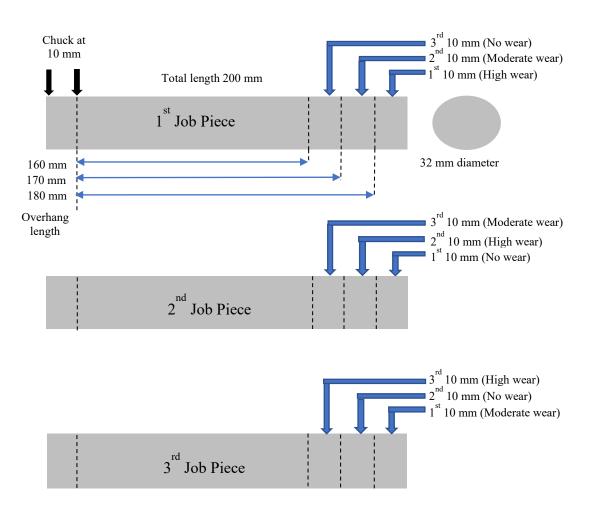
Job pieces with their dimensions and cutting conditions along with different wear inserts
